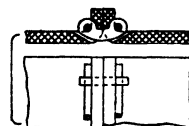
, BUTT JOINT WITH APRON PIECE.
